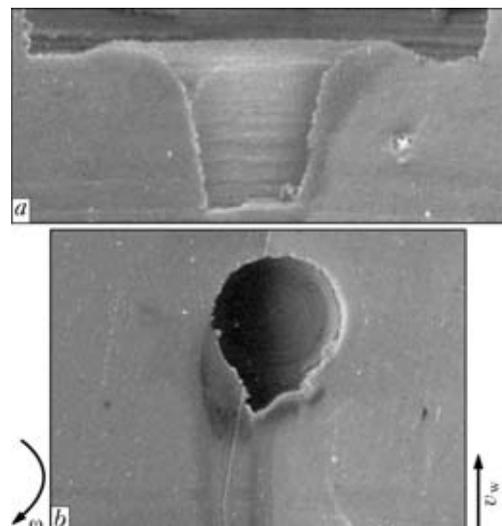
Appearance of the section of vertical (*a*) and horizontal (*b*) plane of butt joints produced by FSW using tools with a tip of a conical shape and smooth side surface
